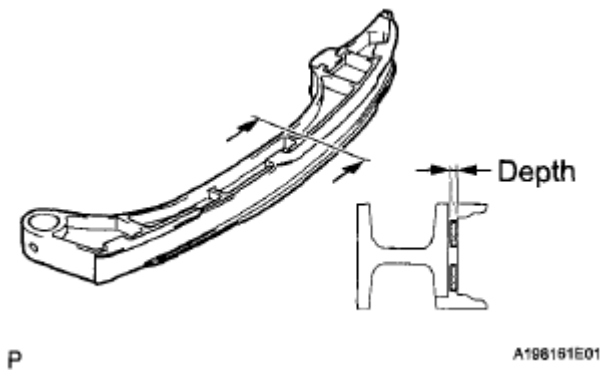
Identifying Worn Depth Of Chain Tensioner Slipper
